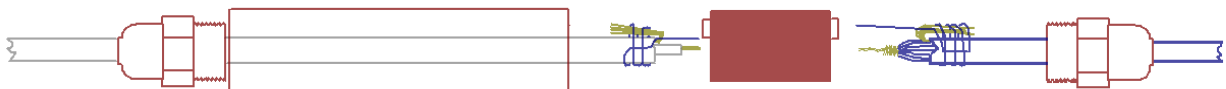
Cable joint for connection of sensitive and non-sensitive cable
